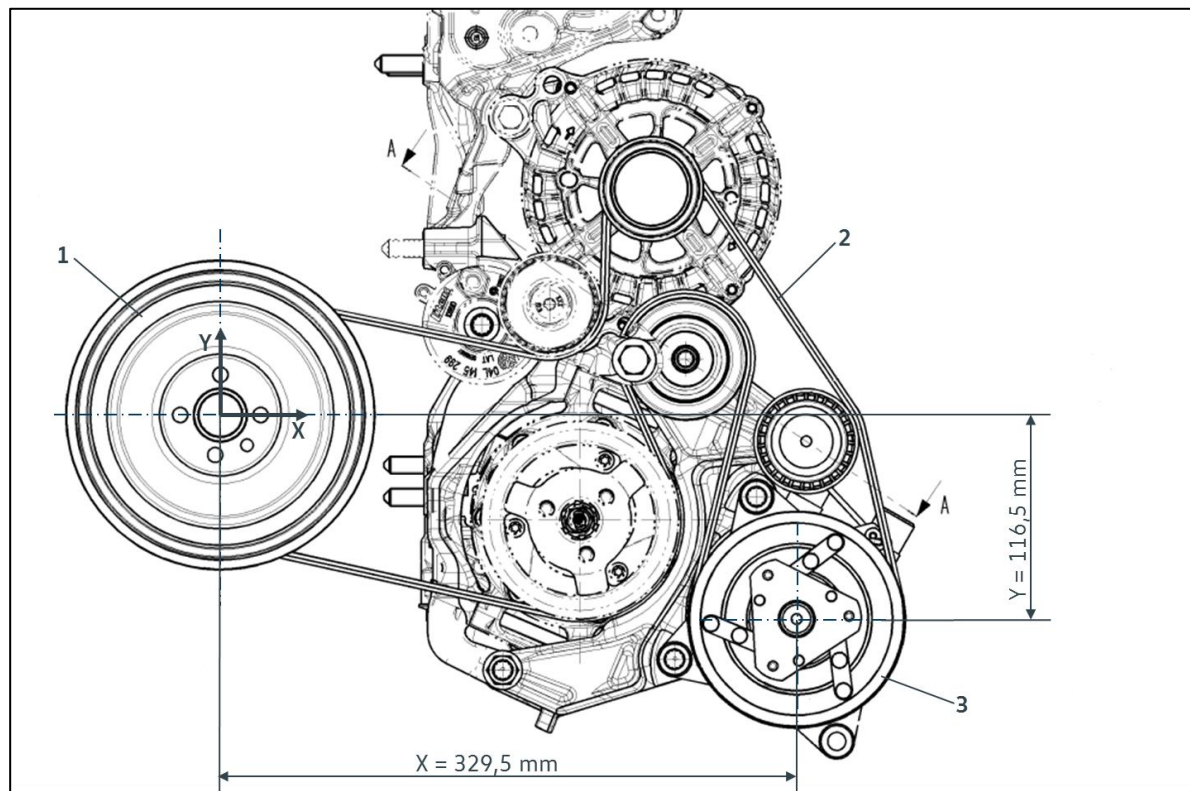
Drive arrangement of the additional air conditioning compressor, axle distance to the crankshaft pulley
